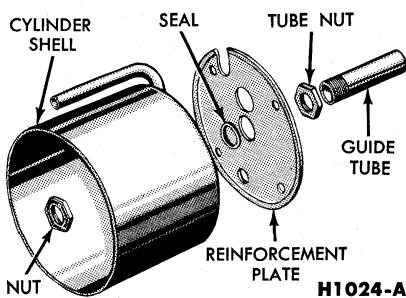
Disassembled Cylinder Shell and Guide Tube
